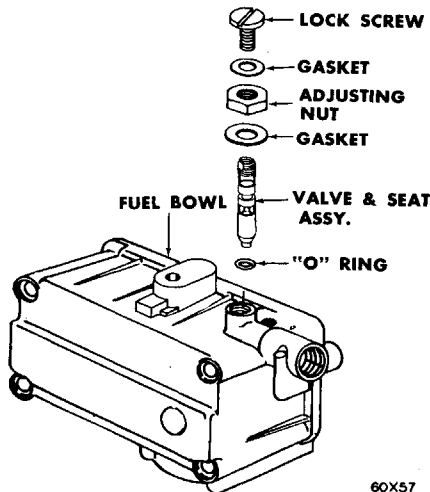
Fuel Inlet Needle Valve and Seat (Exploded View)
